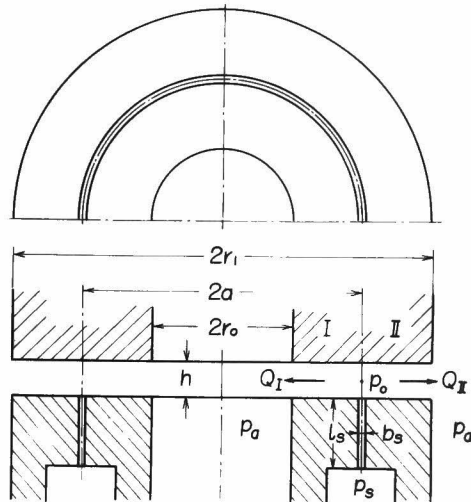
Configuration of thrust collar bearing with single slit-supply
